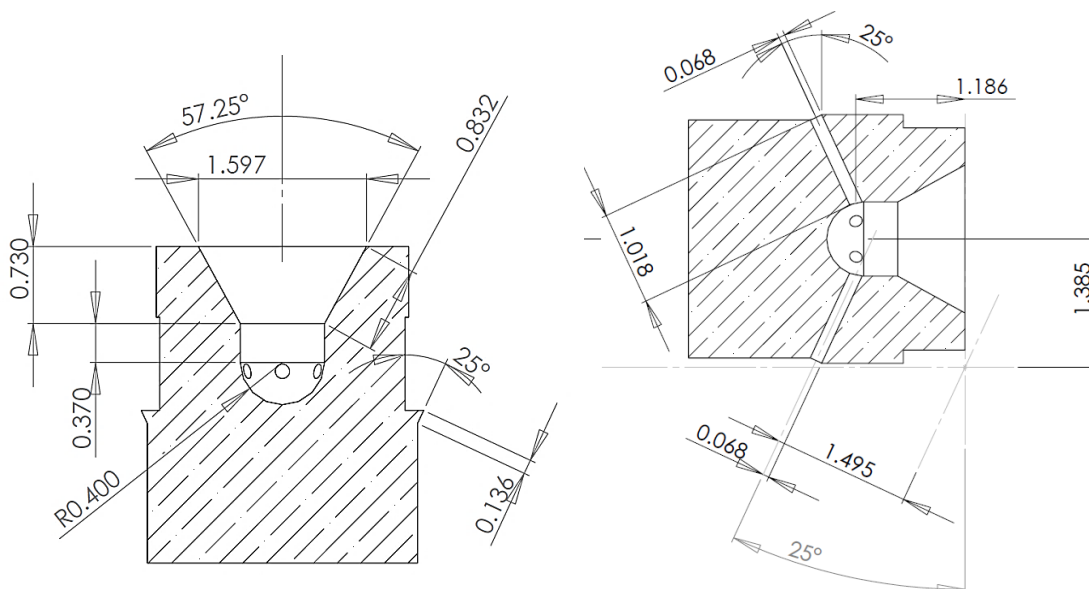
Acrylic nozzle cross sections showing the internal dimensions<sup>16</sup>.
